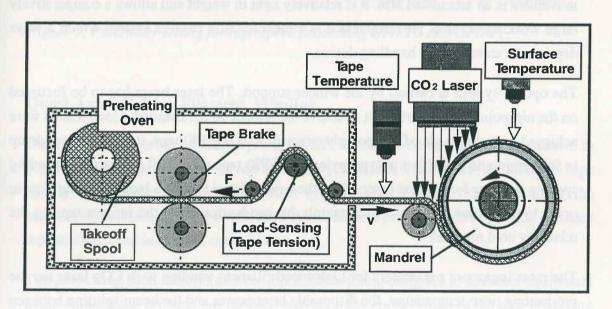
Laser processing set-up scheme. (F = tape-tension, v = winding speed)
